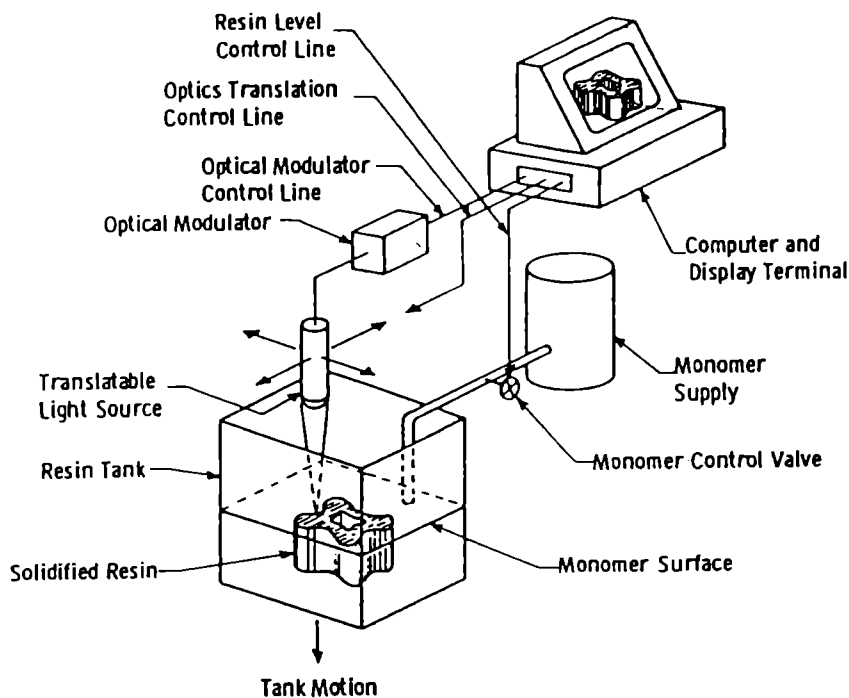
Mechanically scanned laser 3D CAD—CAM device [2]
